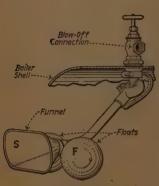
Skimmer which floats. (Buckeye Boiler Skimmer Co.)
